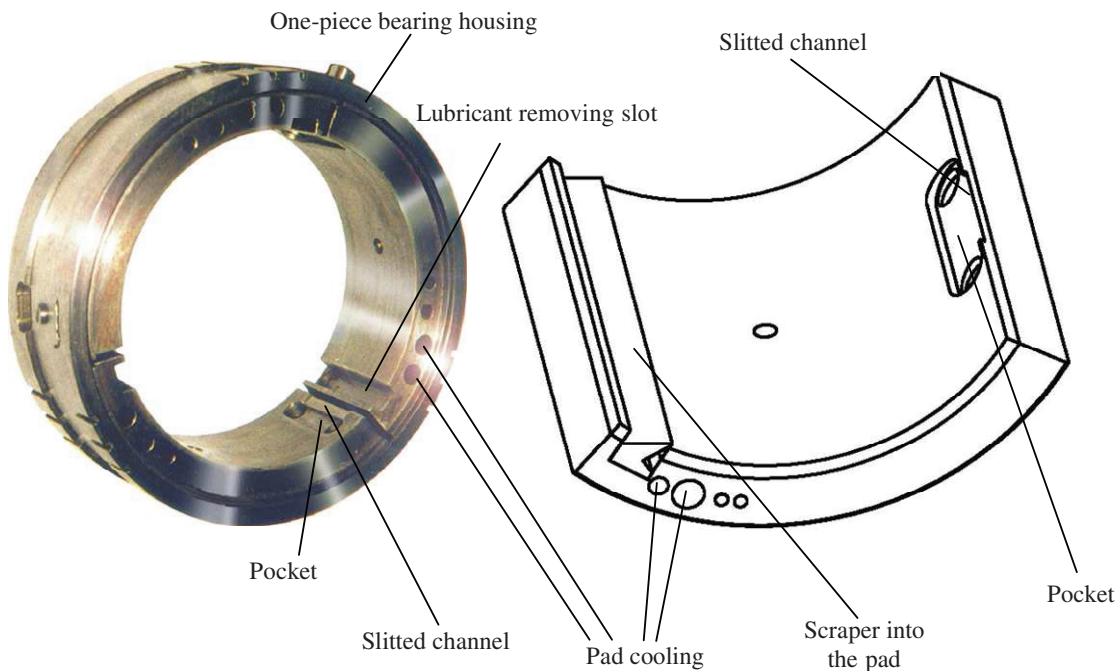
Three-segmented damping bearing on hydrostatic film for cycling process compressor
